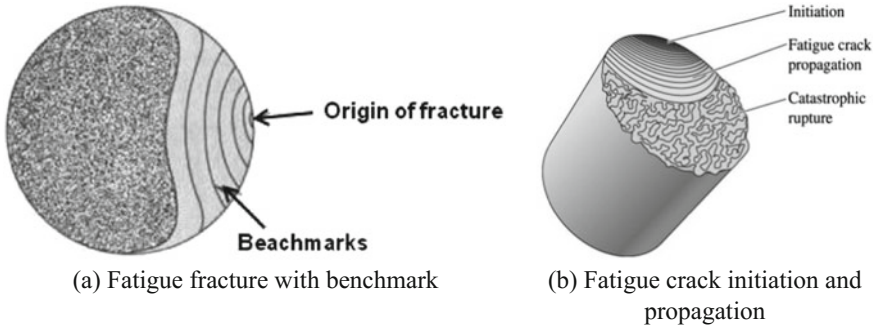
Schematic representation of fatigue fracture surface
